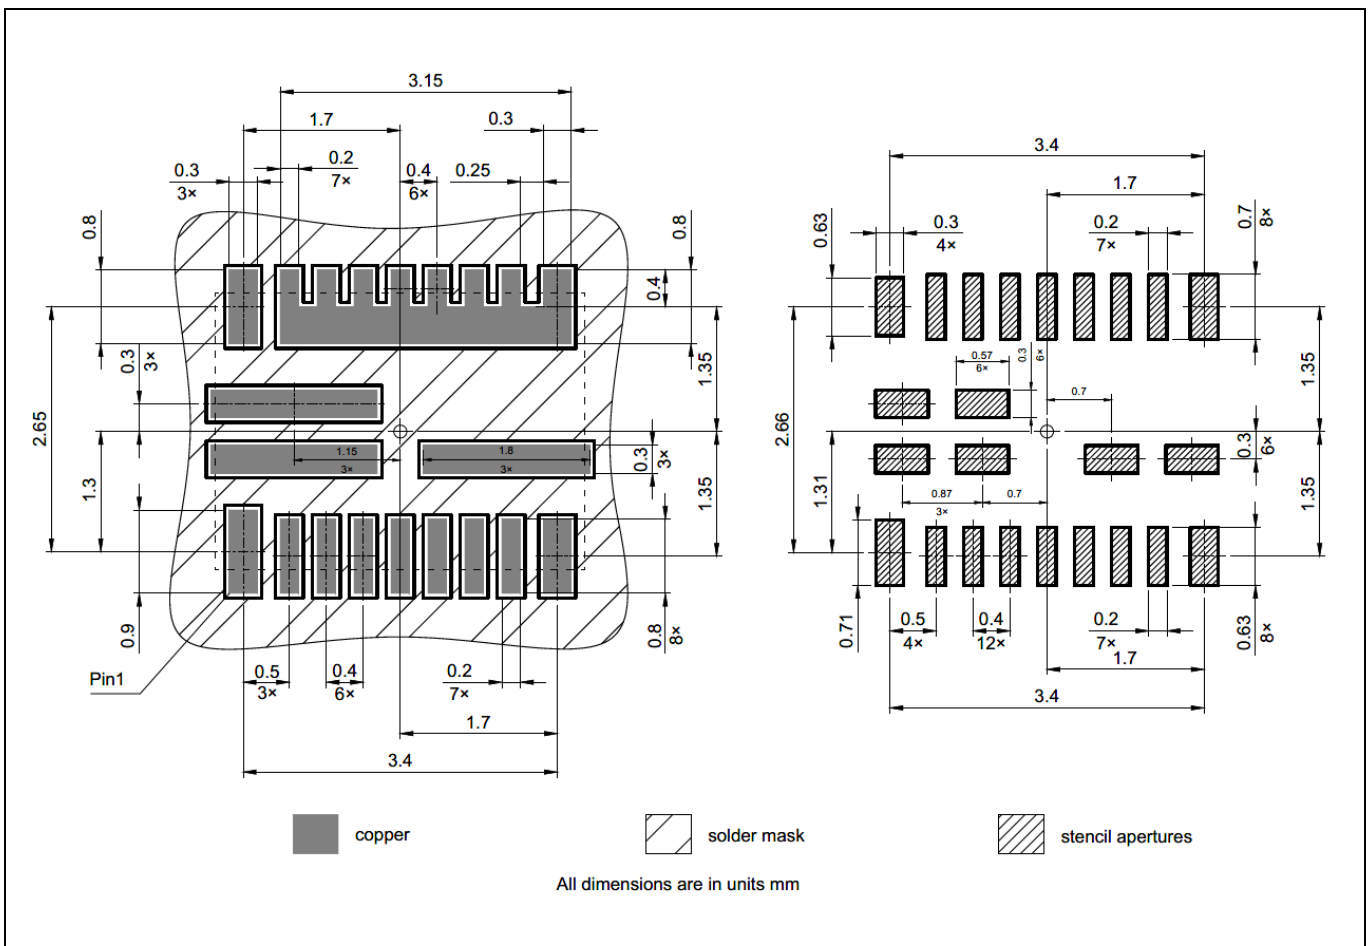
PCB metal, solder mask, and Stencil - pad size and spacing
